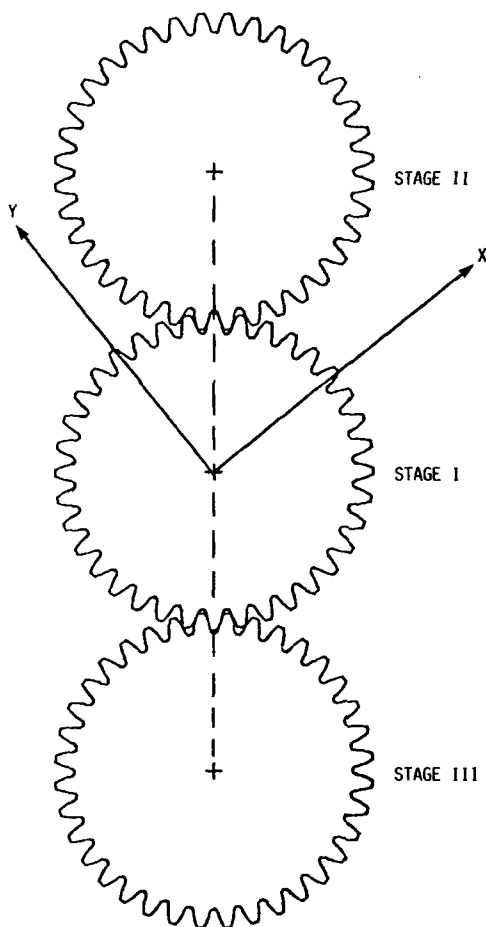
GEAR MESH SYSTEM USED AS EXAMPLE.
